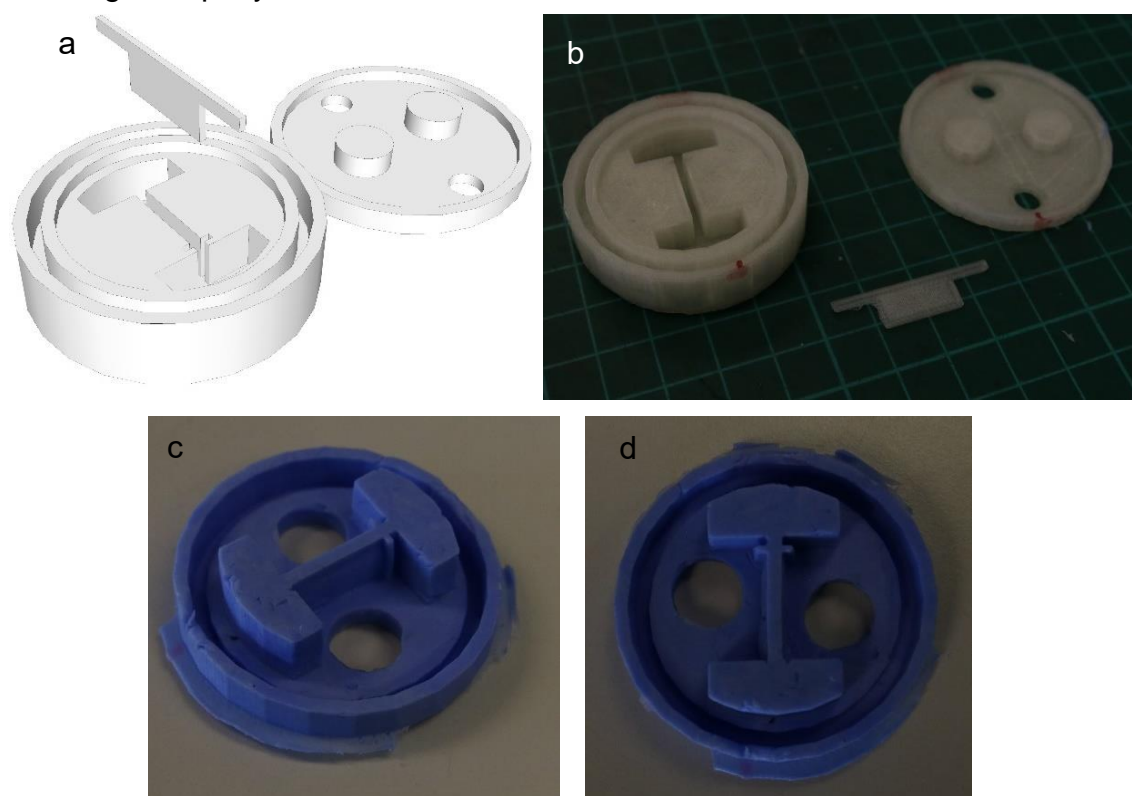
CAD for the second generation epoxy chemotaxis chambers moulds, the 3D printed PLA mould with the 3D printed PLA support and the silicone cast produced. a) CAD design created in Google Sketch Up (64 bit) 2017 for the second generation epoxy chemotaxis chamber moulds. b) 3D printed PLA mould and PLA support printed using Ultimaker 3 extended. c) and d) The silicone cast created from the PLA mould. Results representative of the production of one 3D printed PLA moulds and 4 silicone casts.
